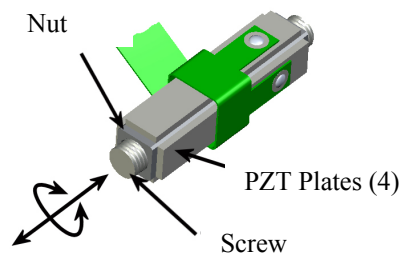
SQUIGGLE motor – a vibrating nut turns a screw
